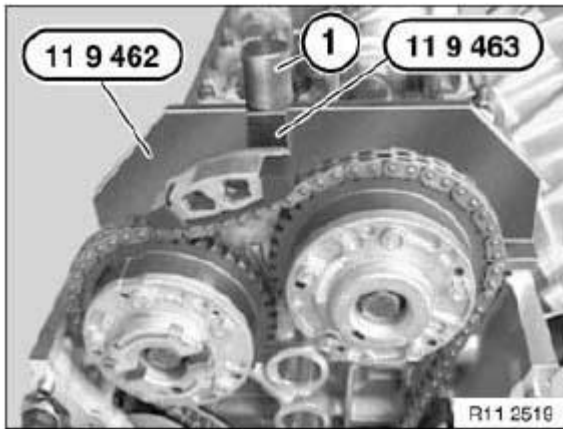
Identifying Special Tool (11 9 462) And (11 9 463)
